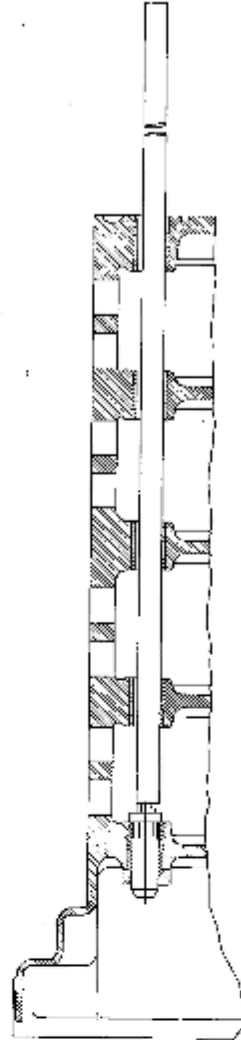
CAMSHAFT BUSH EXTRACTING AND INSERTING STOCK AND BAR.
